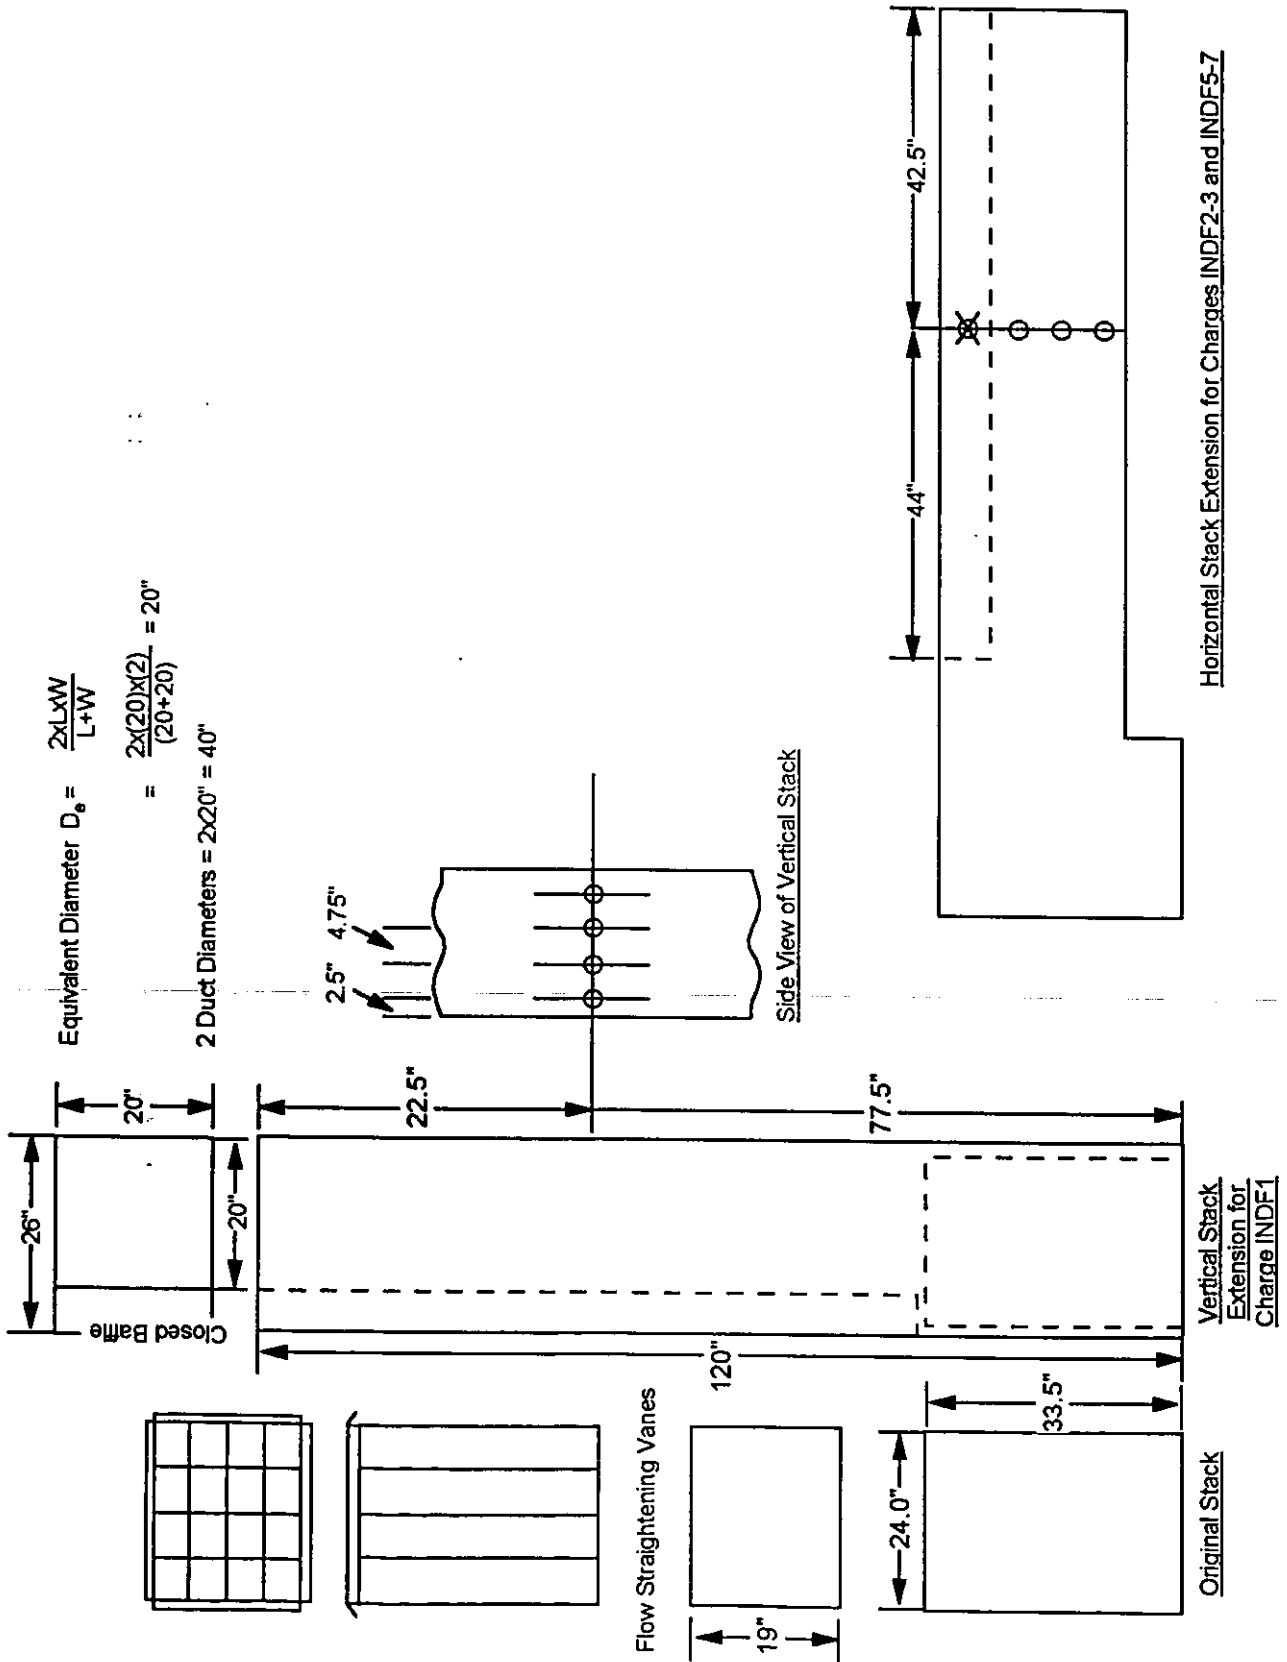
Stack Extensions used at the Steam-Heated Full-Scale Kiln
